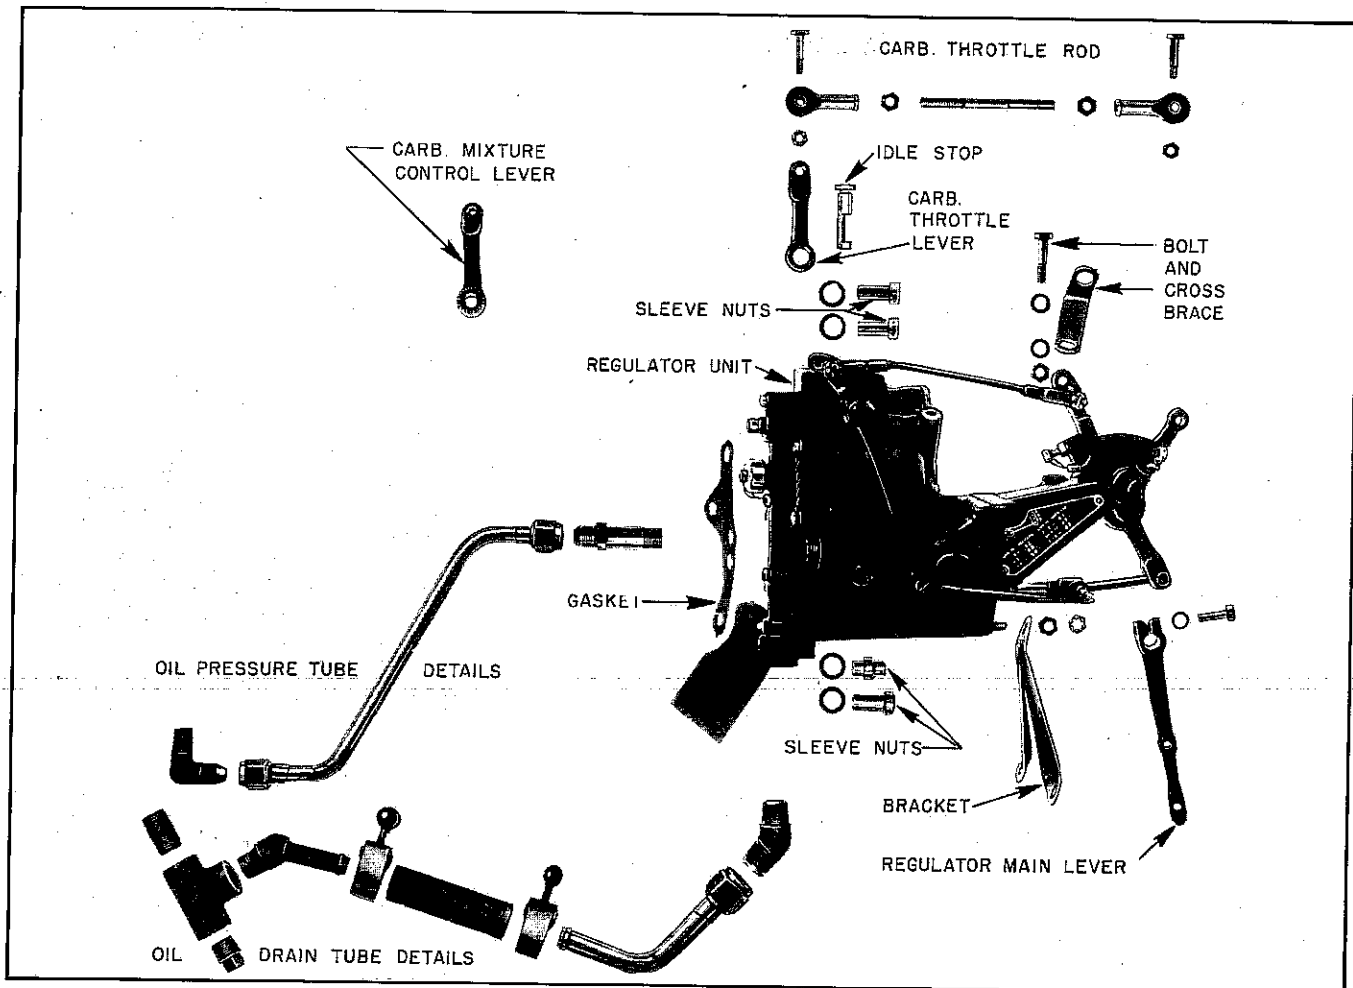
Automatic Manifold Pressure Regulator Showing Type III Installation Detail Parts.
